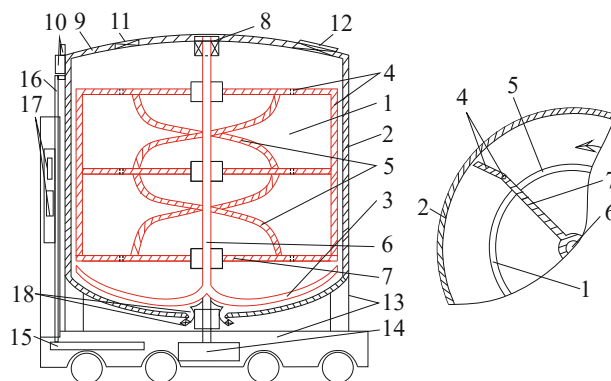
Scheme of the improved mobile model structure of the vacuum-evaporator with a unified stirrer (where A is a fragment of the working chamber with a unified stirrer):
